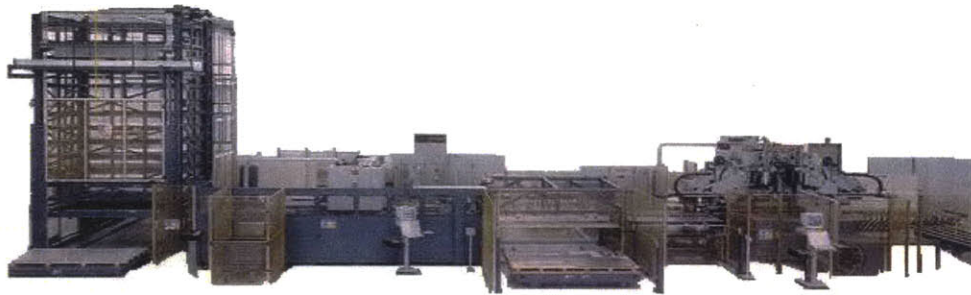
Salvagnini's S4P4 flexible sheet metal fabricator
